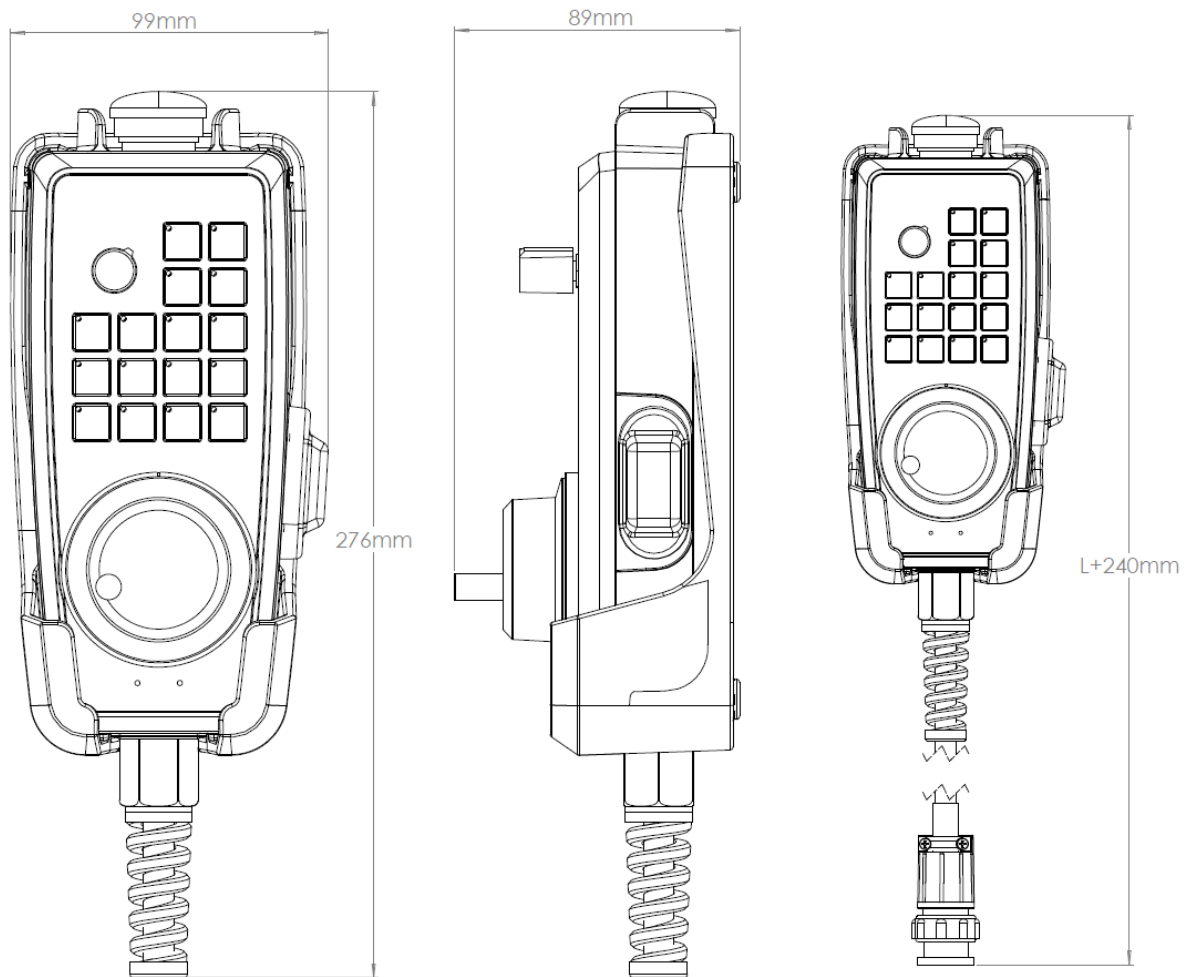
Remote Pendant Standard with Cradle Dimensions (mm)
